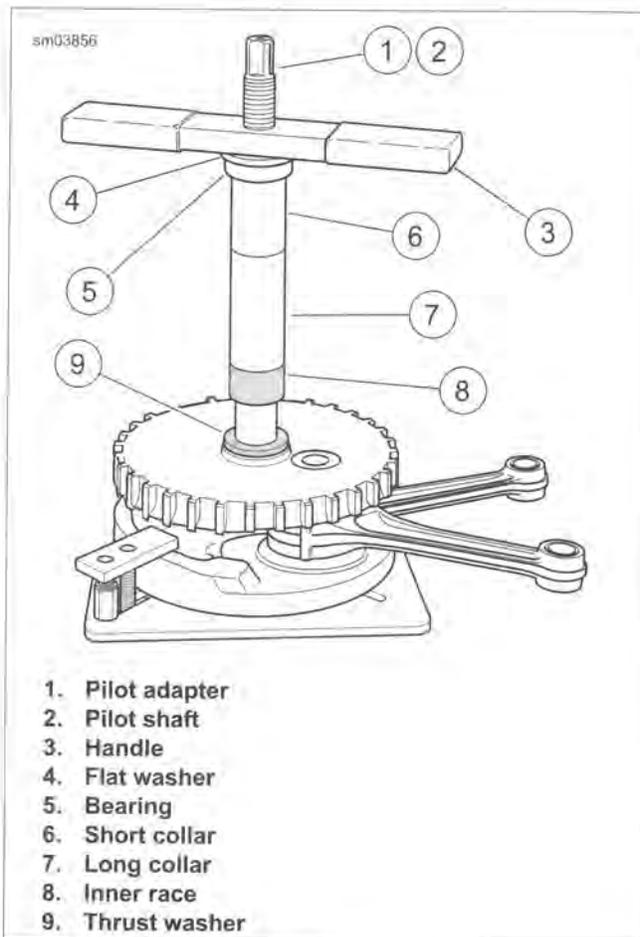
Press Inner Race onto Sprocket Shaft: Setup
